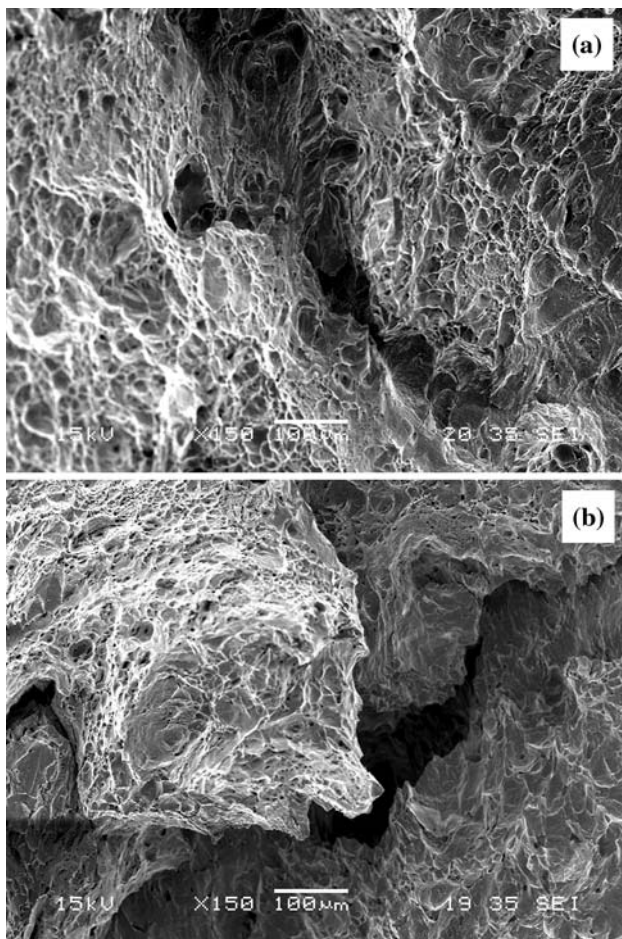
Fractographs of samples from WM tested at -60°C (a) Weld 1 and (b) Weld 2
